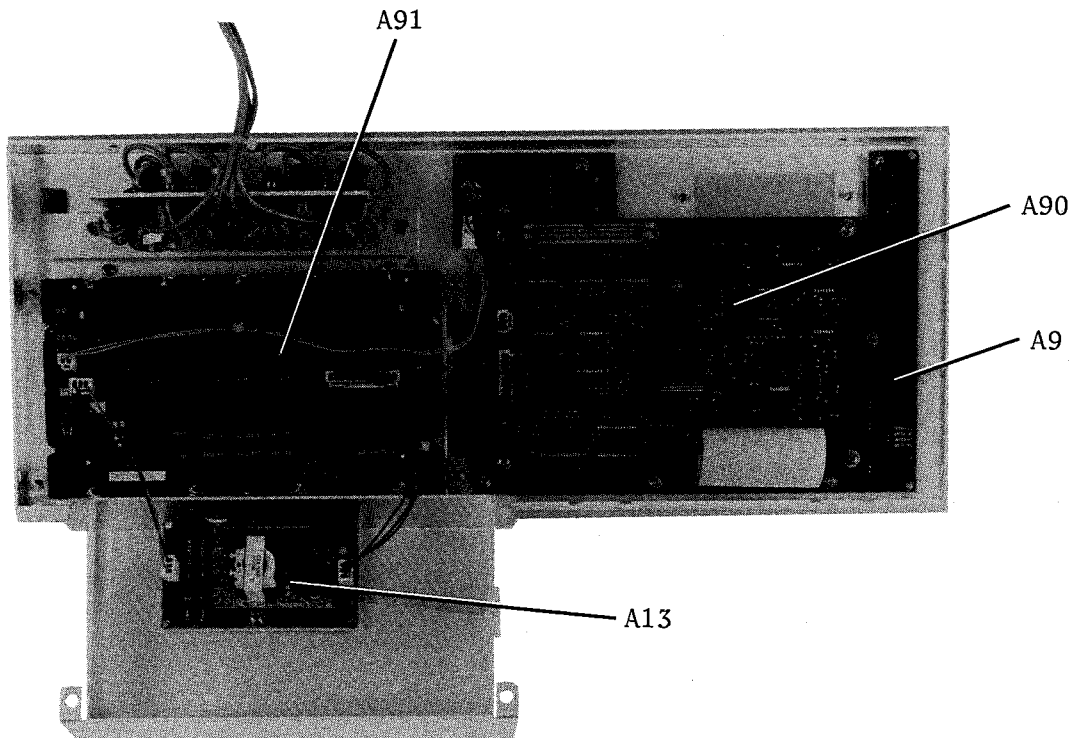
A9, A13, A90, or A91 Assembly Removal
